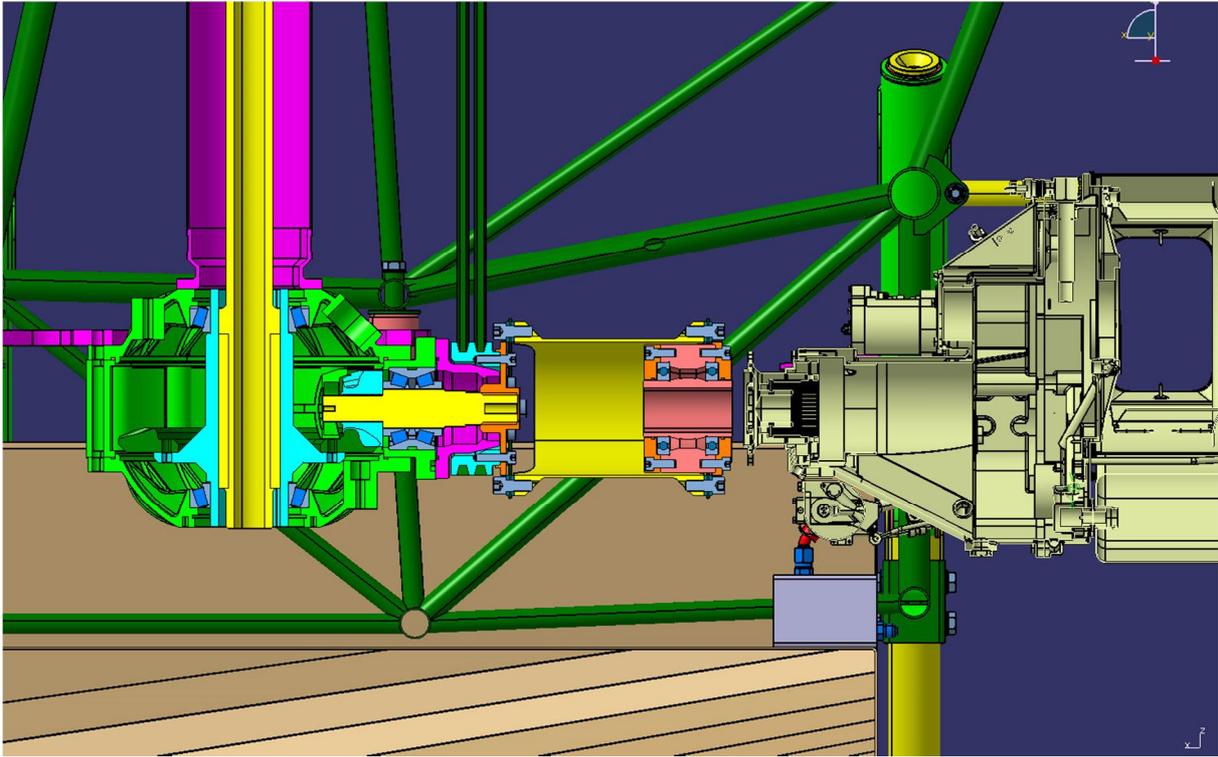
Detailed Catia view of the TS100 engine – main helicopter gearbox – chassis B250 integration
